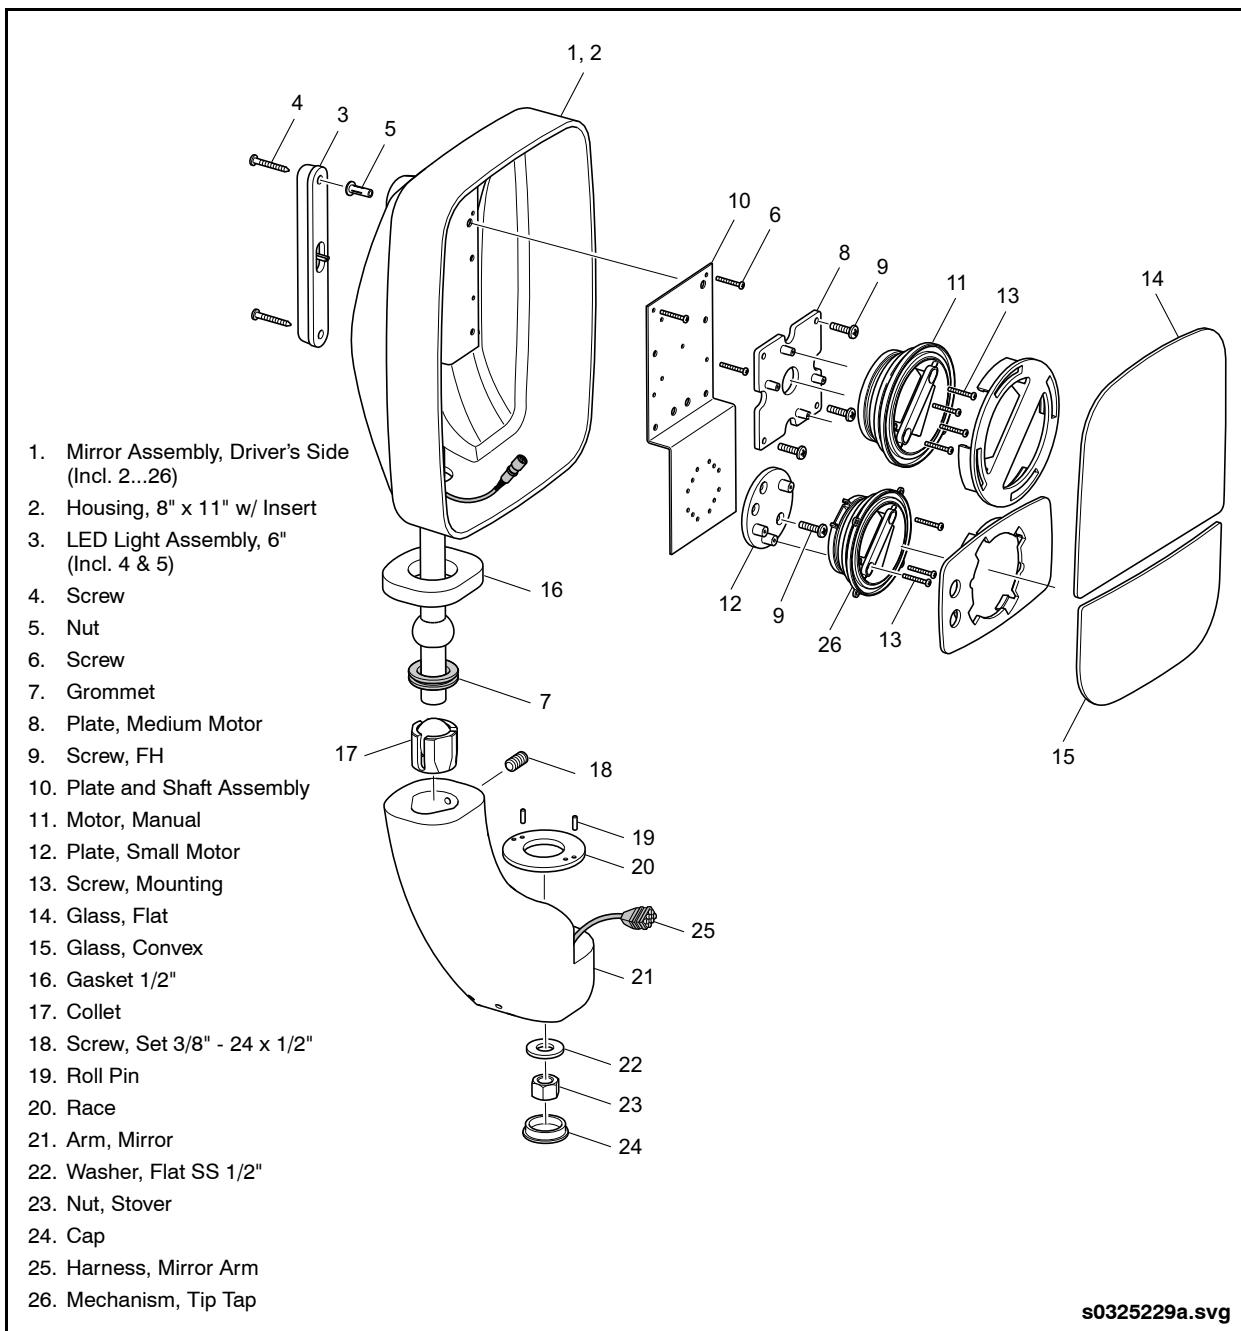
Exterior Driver's Side Mirror Assembly
